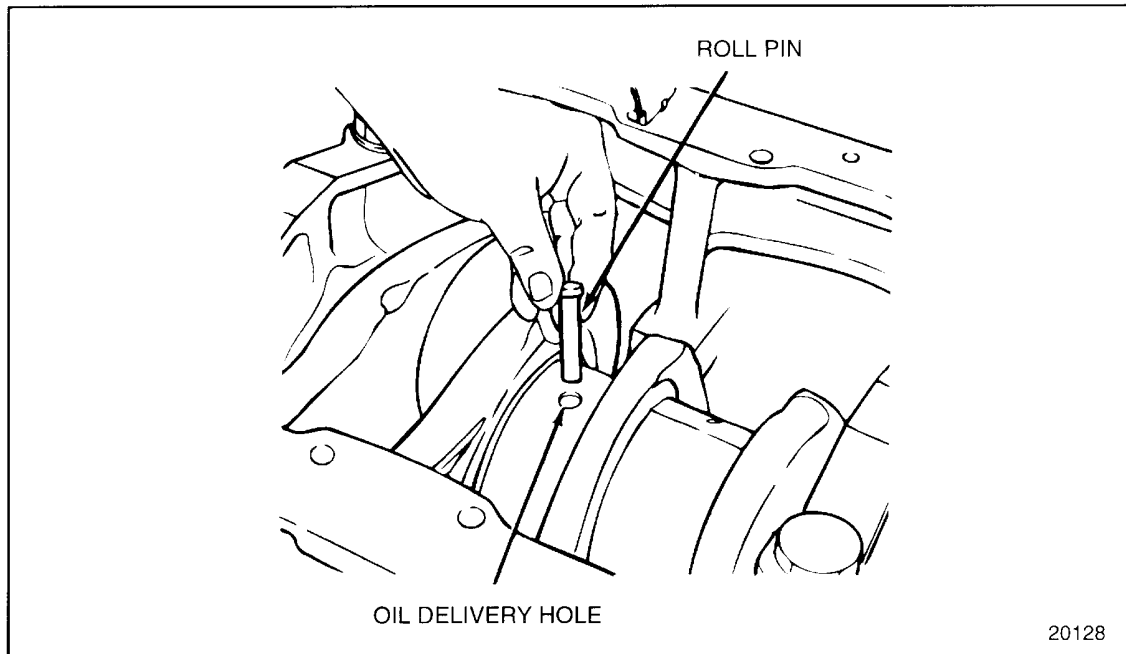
Upper Main Bearing Shell Removal and Roll Pin Installation
